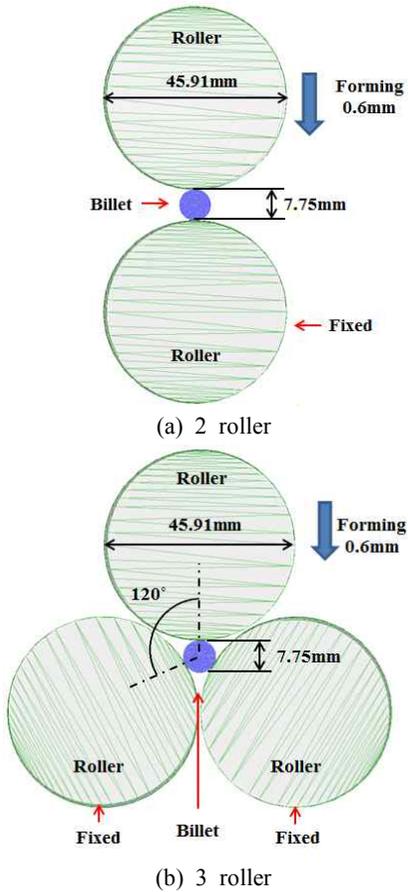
Schematic drawing of diaphragm valve in form rolling process
